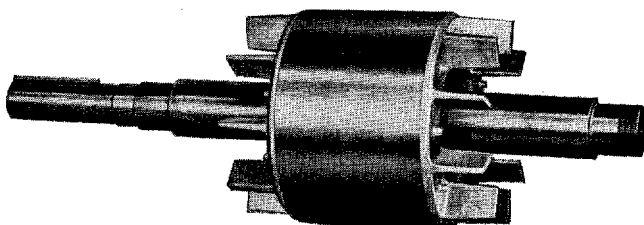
Rotor spider and core assemblies for large squirrel-cage induction motors.
